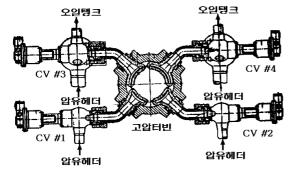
Hydraulic oil line for steam control valve of HP turbine
